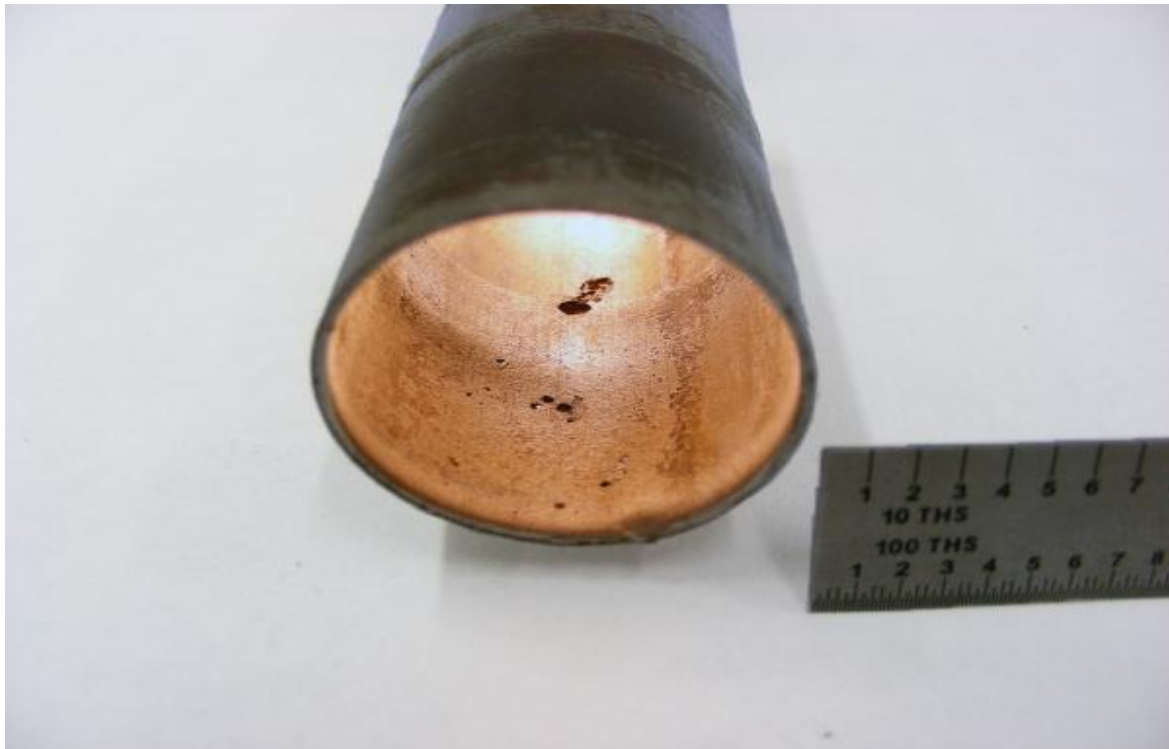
Pitting corrosion in boiler tube A [32]
